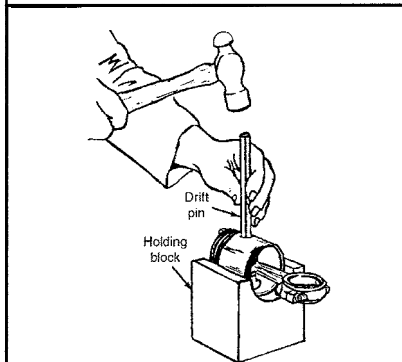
The best method for removing wrist pins is using a holding block and a drift pin (driver) along with a shop press or hammer to push the wrist pin from the piston
